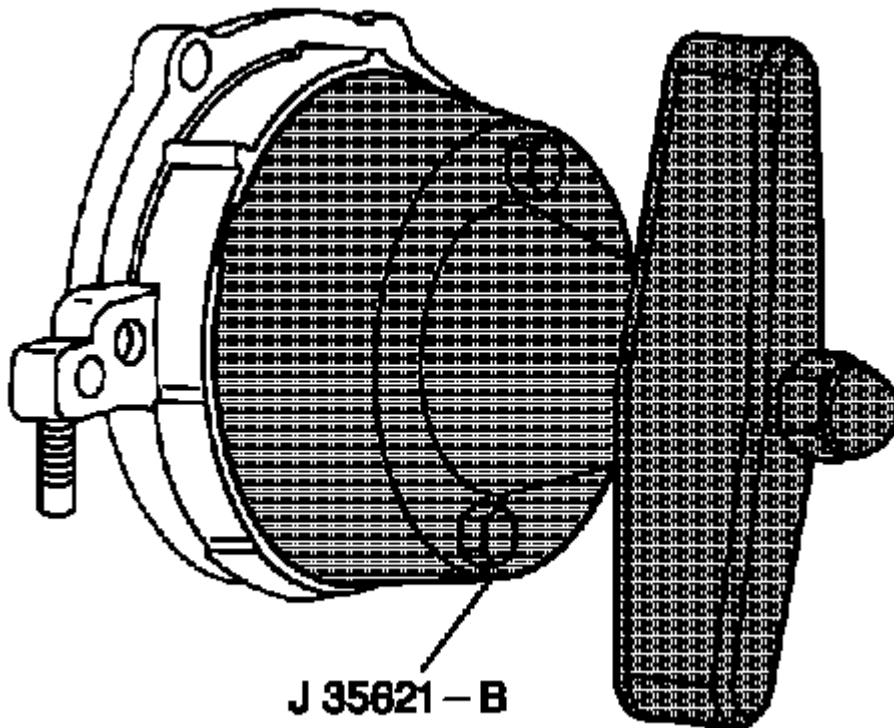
View Of Crankshaft Rear Oil Seal Using Special Tool J 35621-B
